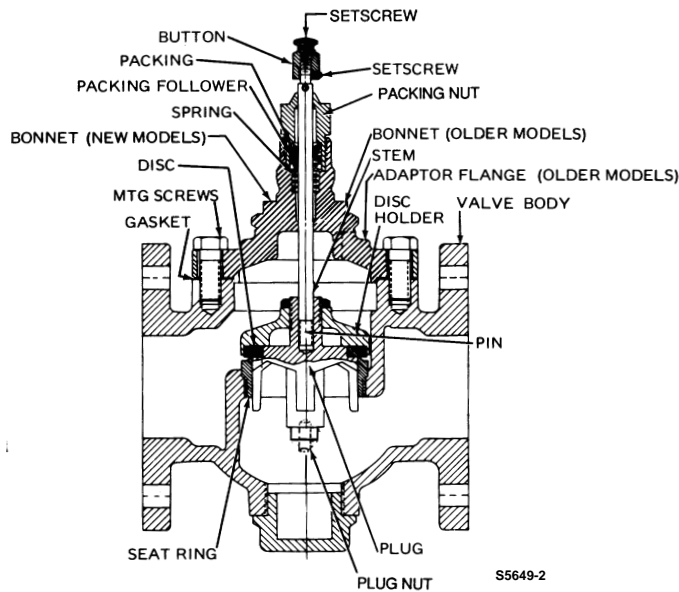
V5011A and D Direct Acting Flanged Body Valve—Cutaway.
